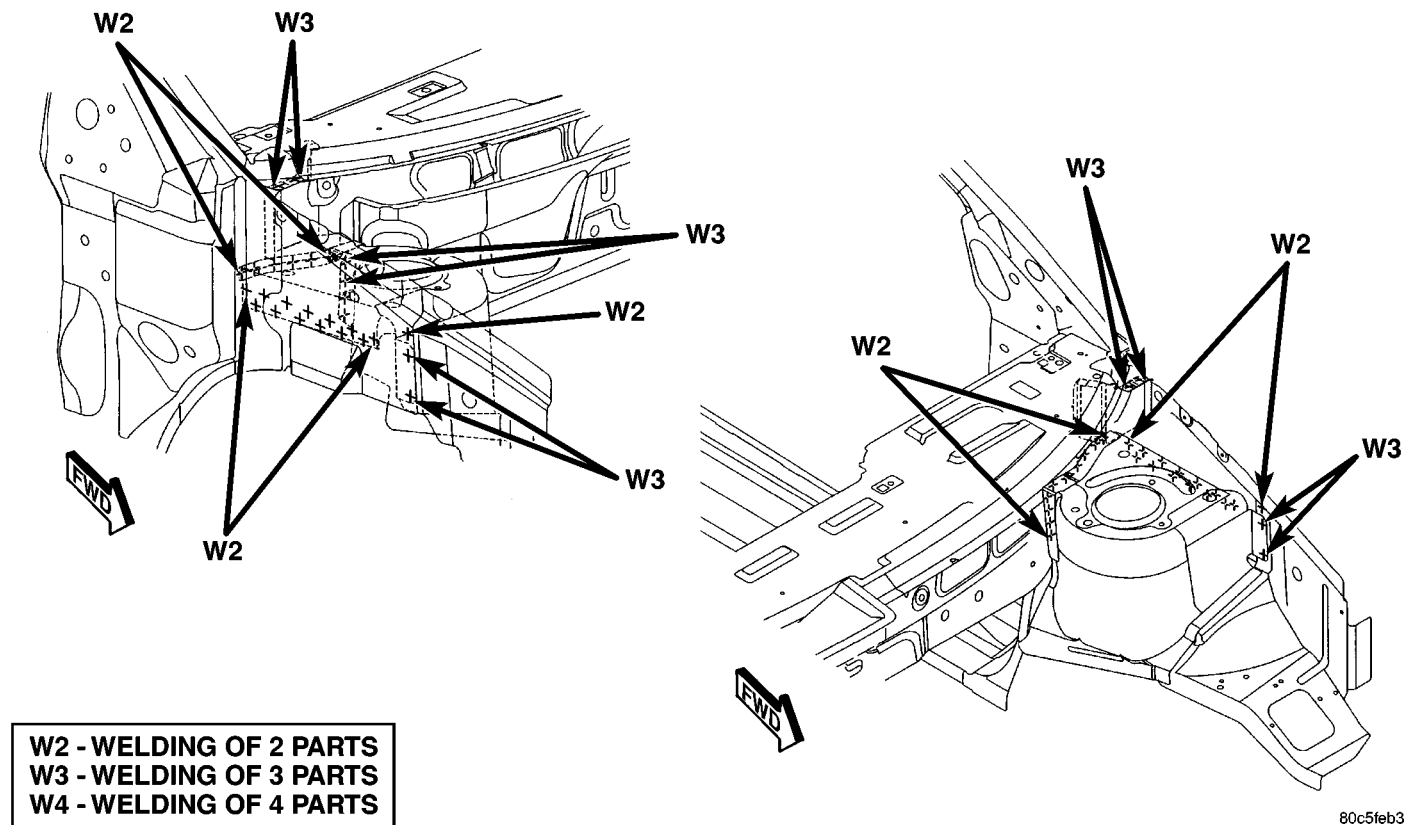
STRUT TOWER BRACKET AND COWL PLENUM
